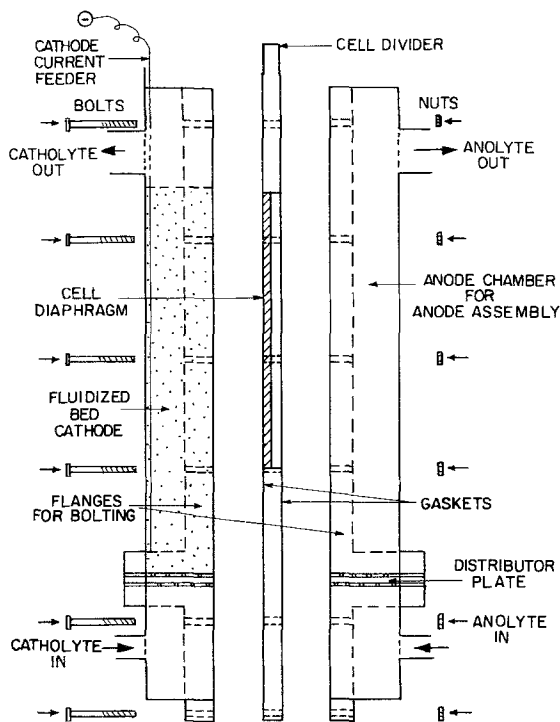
Exploded view of rectangular fluidized-bed cell.
